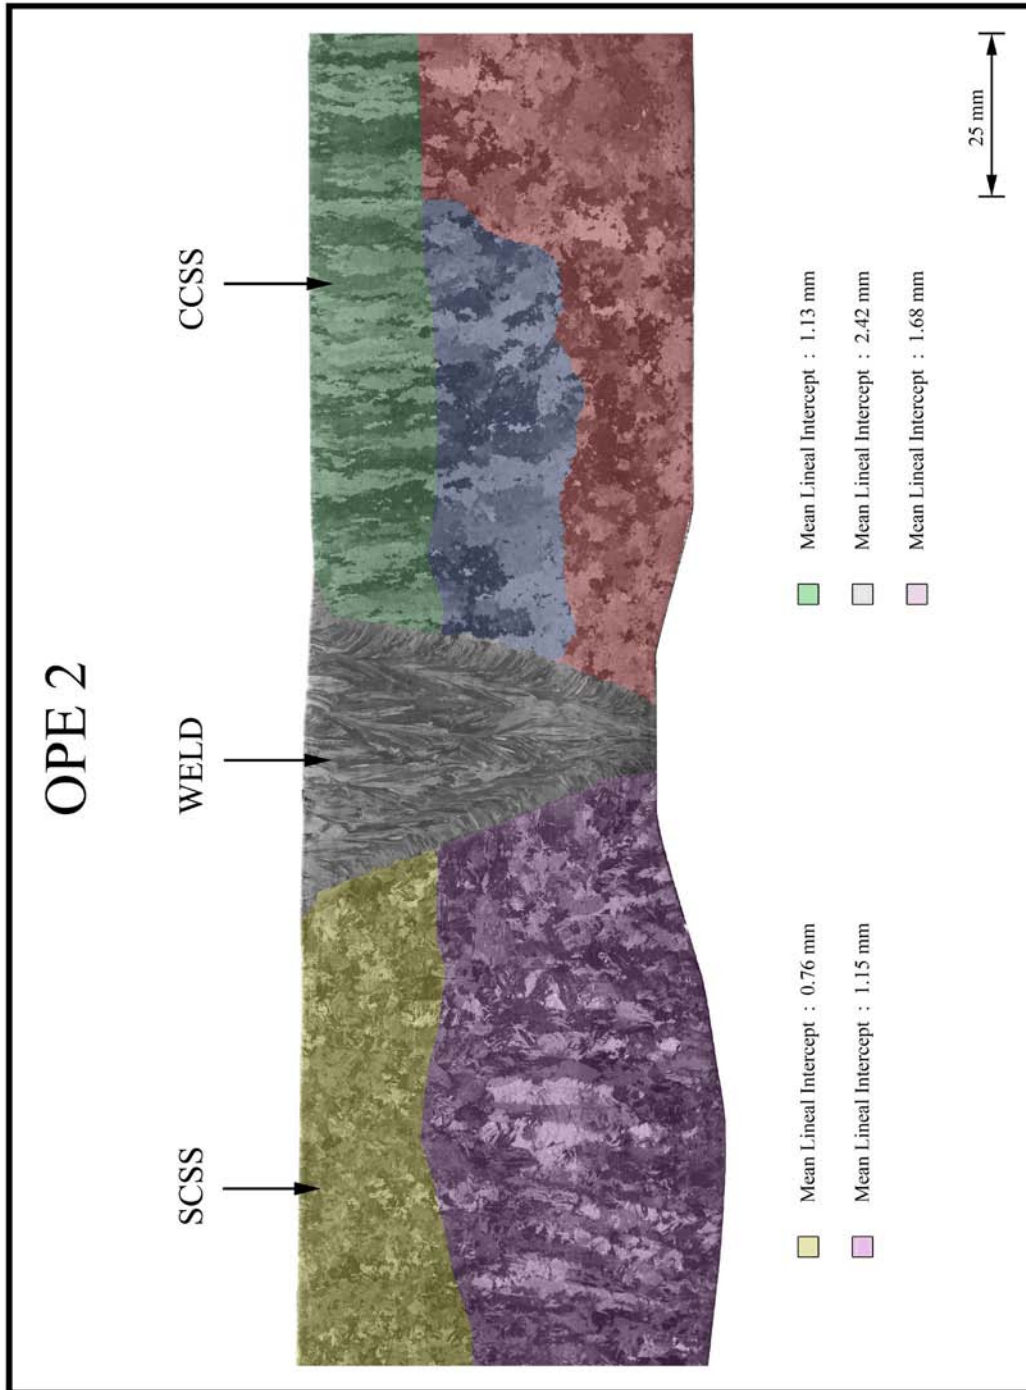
Axial-Radial Cross Section of WOG Specimen OPE-2, Showing Outside and Inside Diameter Geometry, and Grain Size, Typical of OPE Configuration
